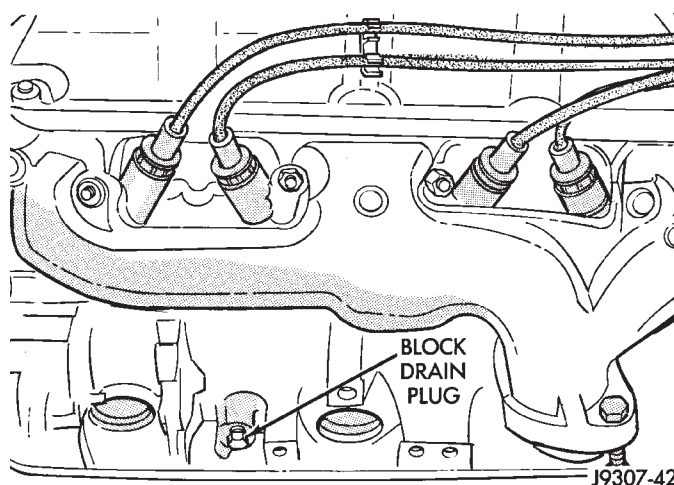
Cylinder Block Drain Plug—3.9L/5.2L/5.9L Engines—Typical
